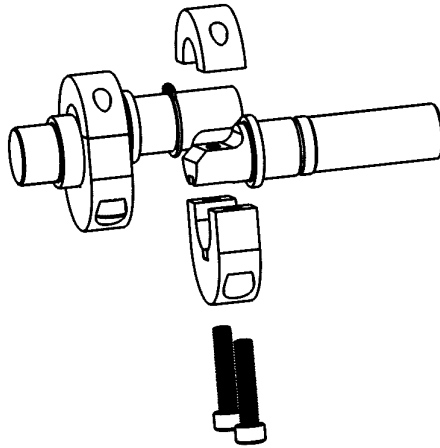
EXPLODED VIEW OF SPLIT CRANKSHAFT DESIGN
